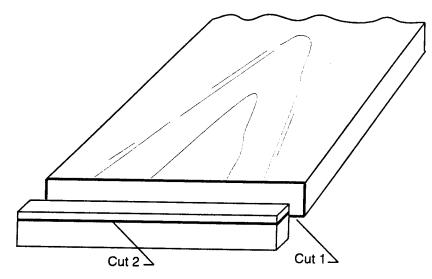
Inspect for surface checks by cutting a small section from end of board.
